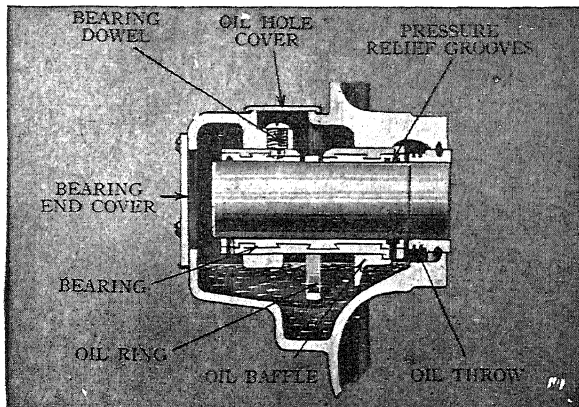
Reliance motor construction 10.* Cross sectional view showing bearing construction and precautions taken to keep oil from inside of motor.
